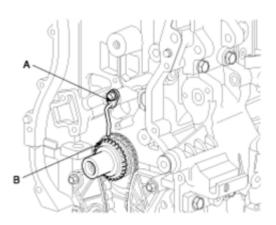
Identifying Crankshaft Sprocket & Timing Chain Oil Jet Courtesy of KIA MOTORS AMERICA, INC.
